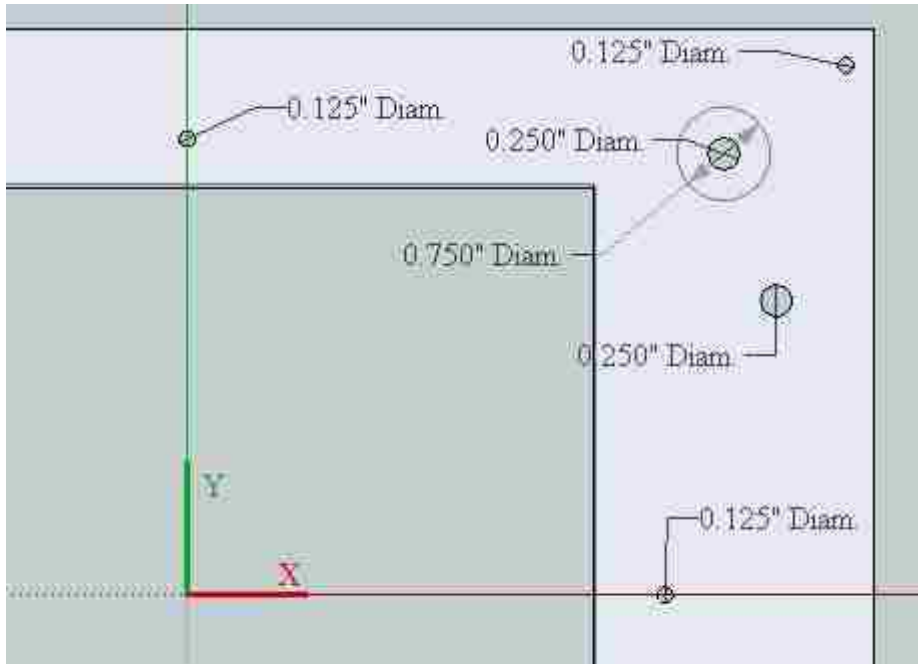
Top view of the 20x20 cm² upper trimmer aluminum plate illustrating hole dimensions.
